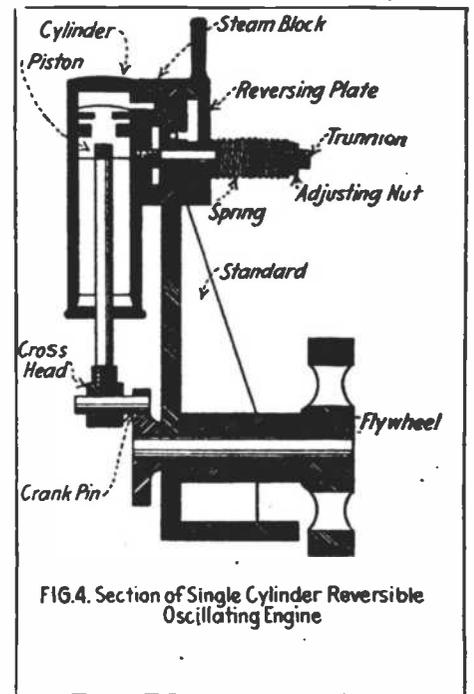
Section of Single Cylinder Reversible Oscillating Engine
